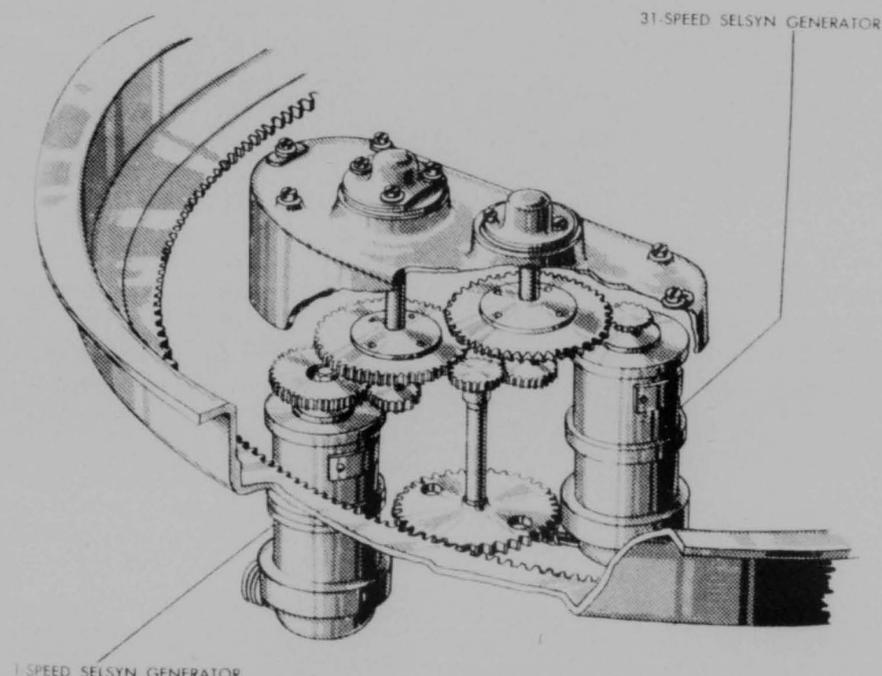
Schematic Drawing of Azimuth Selsyn Units Geared to Stationary Outer Ring Gear.
